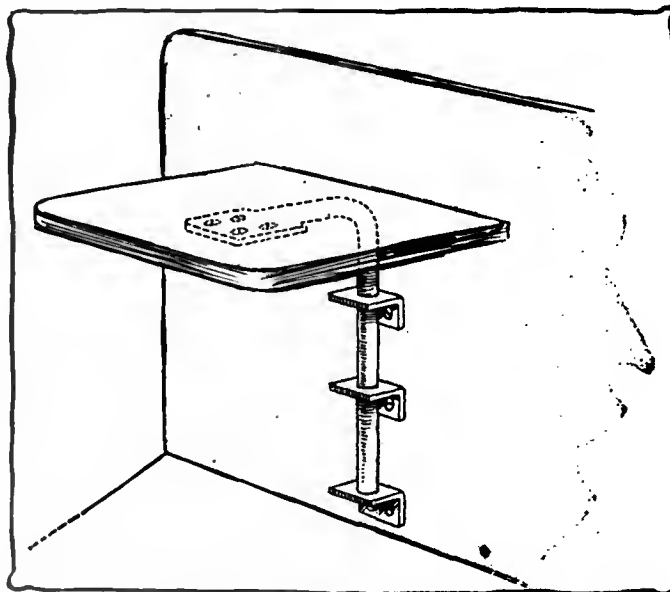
Method of attaching removable home-made seat for child. Bracket is tapered or stepped
